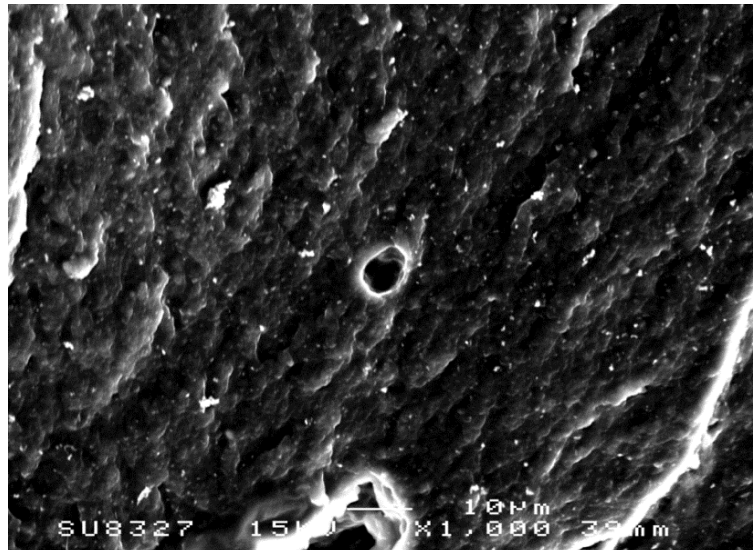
Fracture surface of a spring seal displaying multiple small cracks initiating from an inherent flaw.
